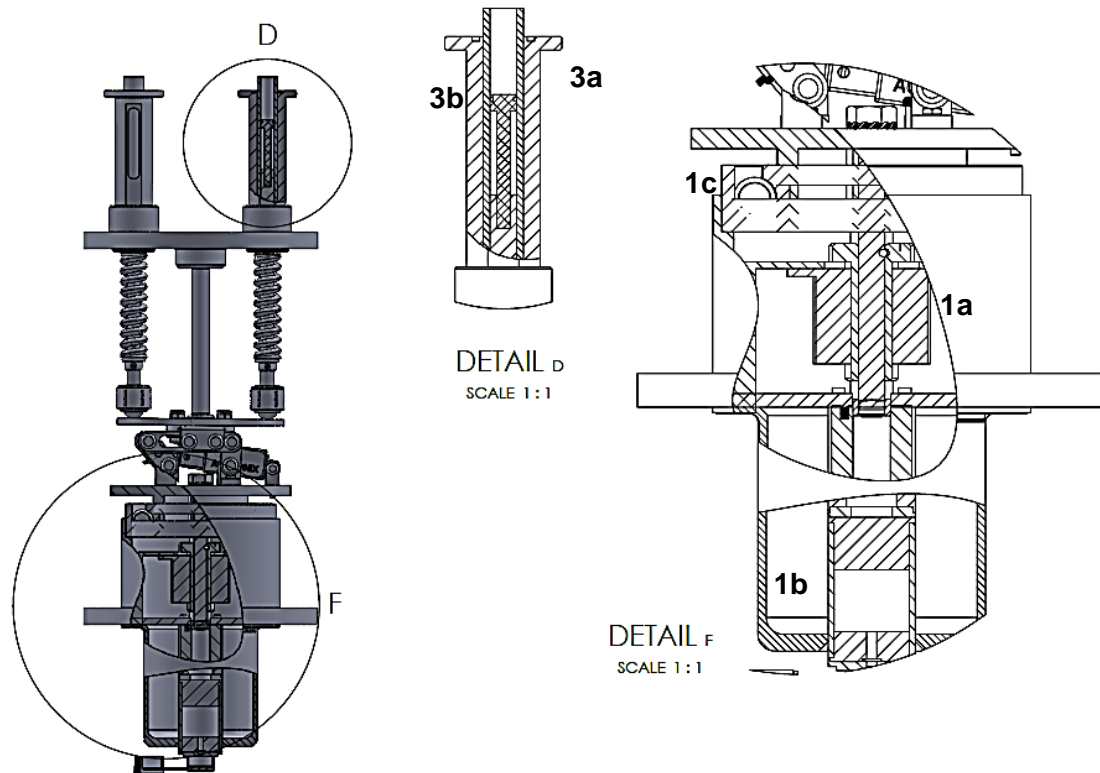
Sectionally broken side view of the COM. Detailed view of the broken sections (MID and RHS).
